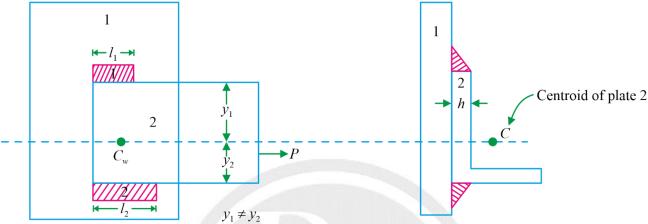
Unsymmetrical loaded parallel fillet weld.
